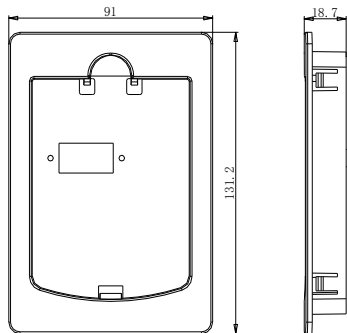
MS20 Series External Keyboard Mounting Base Dimensions
